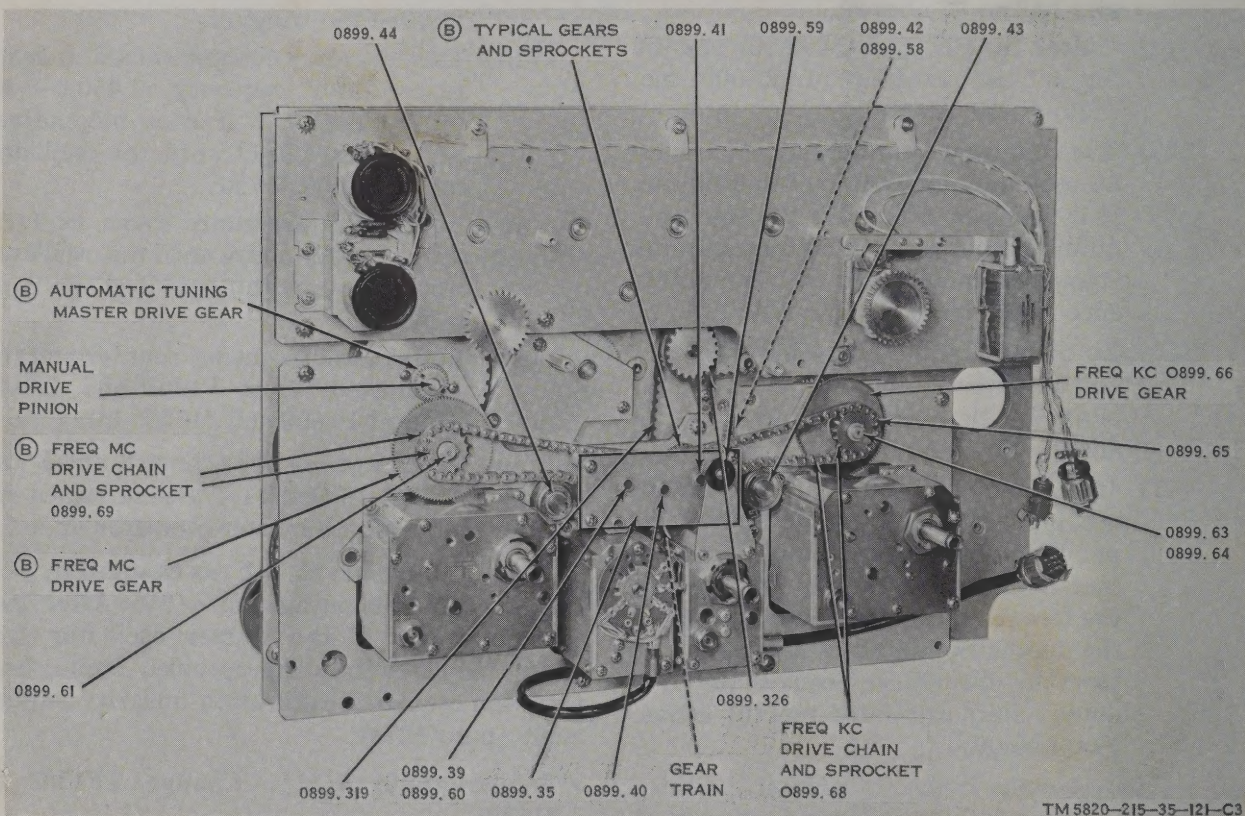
(Superseded) Automatic tuning drive mechanism, lubrication and gear identification.
